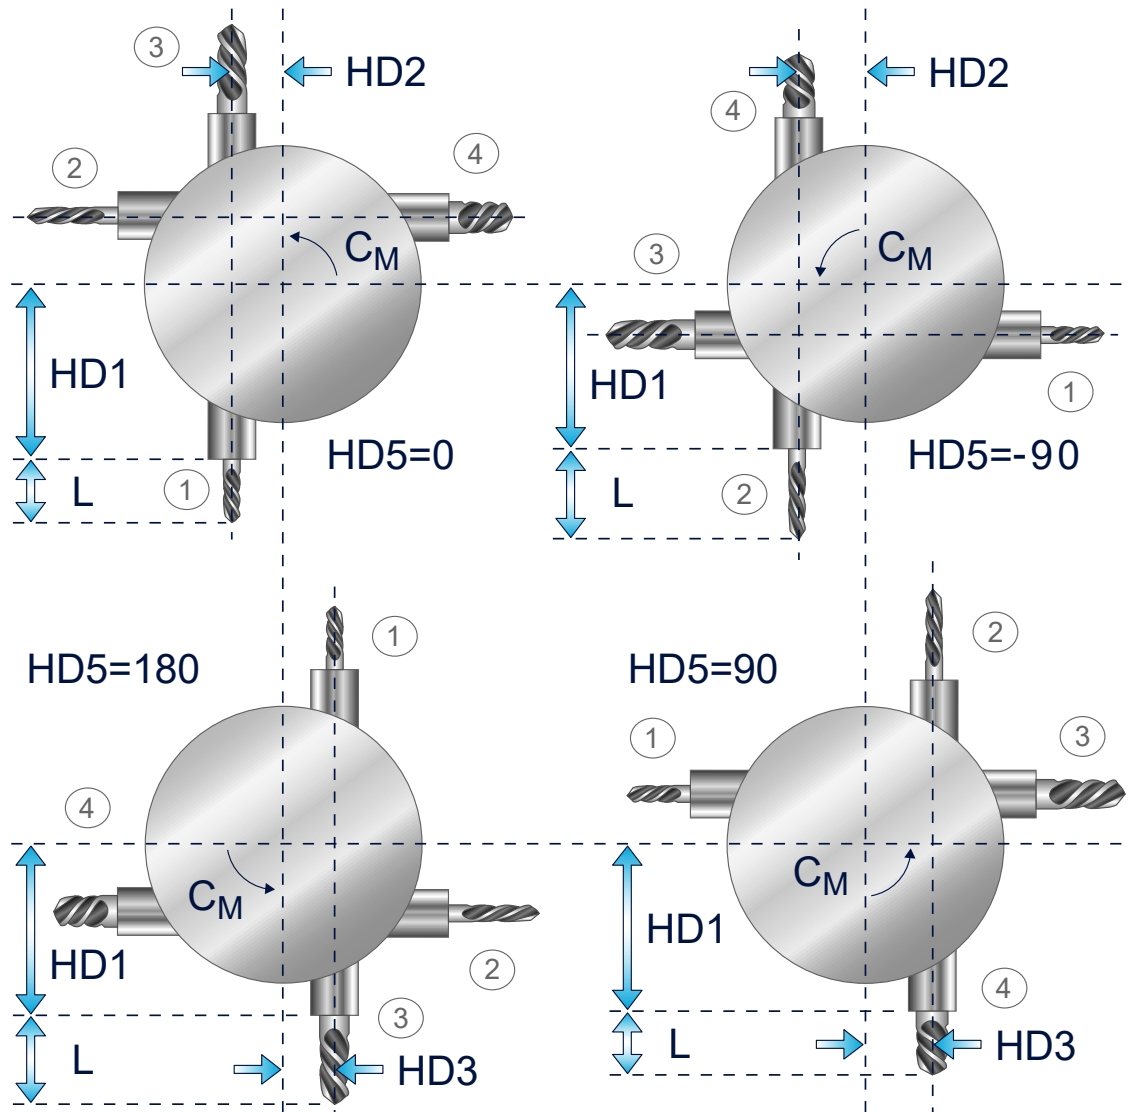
Tool crosshead with zero positions of the tools 1 to 4
